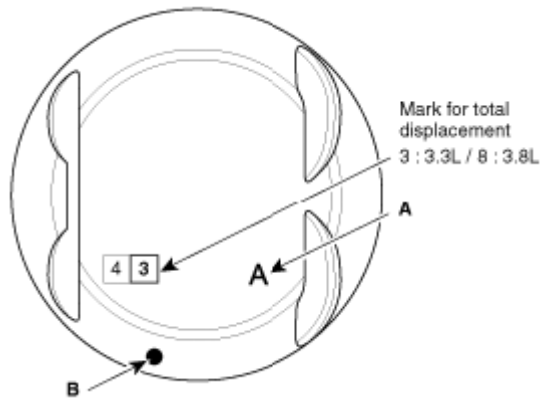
Identifying Piston Size Code And Front Mark On Piston Top Face
